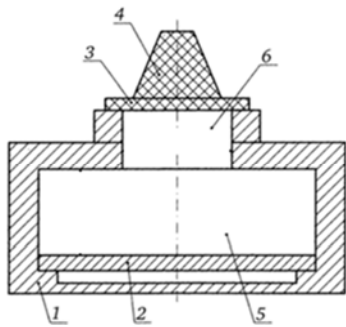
Inductive coil sensor scheme. 1–skin touching plate, 2–return spring, 3–magnetic core, 4–dielectric coil, 5–metal wire winding, 6–signal transmission cables.
